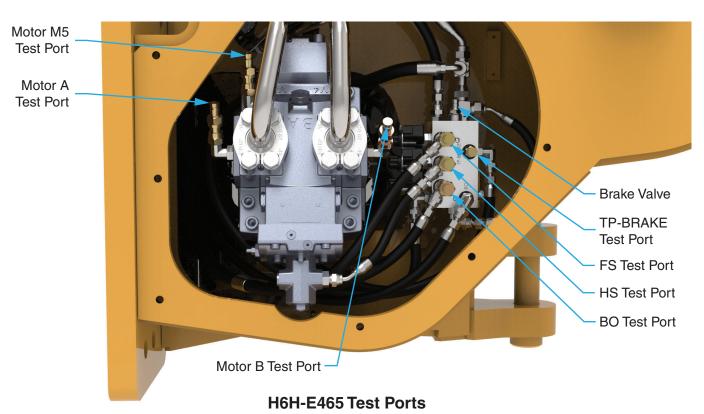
John Deere 750/850K(E/H) (E465) Installation Test Ports and Brake Valve Locations (Typical for Installations with Internal Code D, DL, DE)
